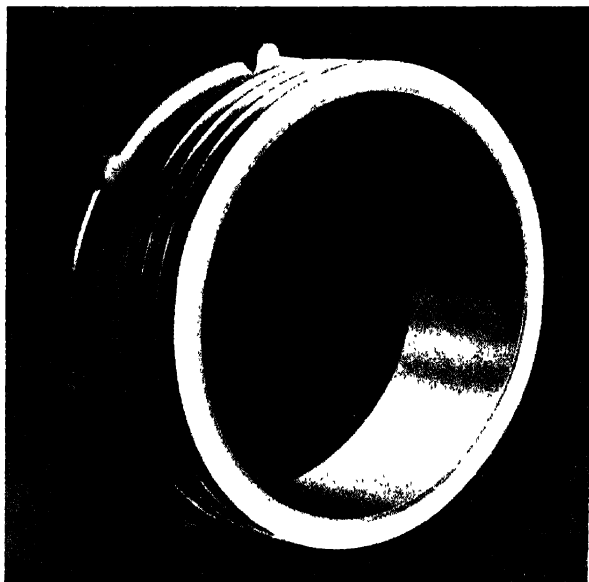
Brake drum cast in aluminium-silicon alloy with steel liner cast integral. (Wm. Mills, Ltd., Birmingham.)
